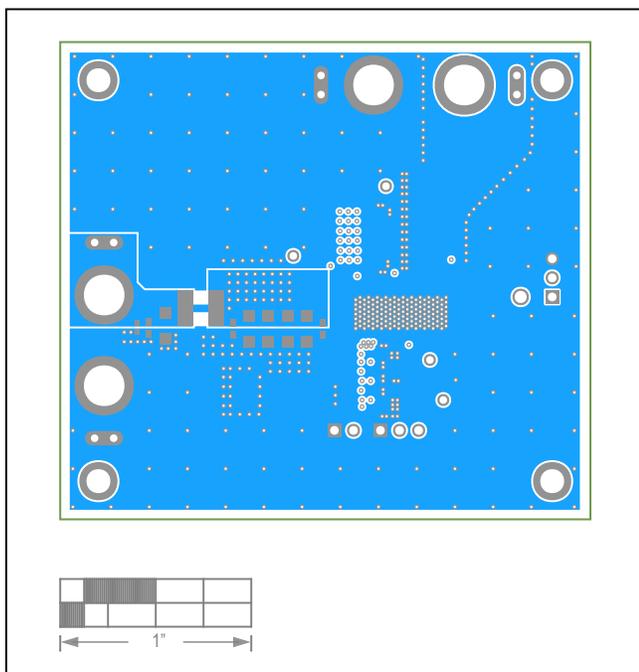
MAXM17536 5V Output EV Kit PCB Layout—Layer 4
